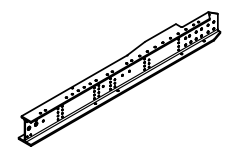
DETAIL IS TYPICAL FOR TWO SUSPENSION LOCATIONS HOLES THRU BOTTOM FLANGE ONLY
